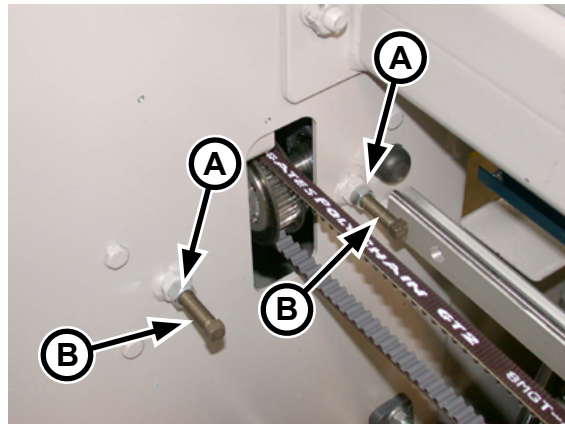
Upper spreader belt tension adjustment bolts on the inside of the left endframe.
